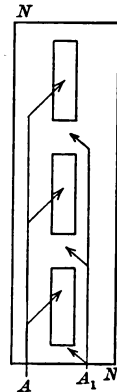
DEVELOPED PISTON VALVE SEAT
